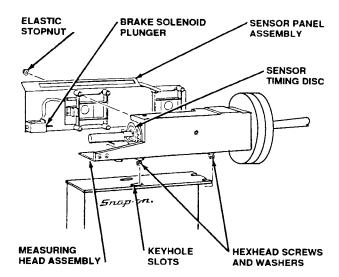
Removing the WBM250 measuring head and sensor panel assemblies (front view).
